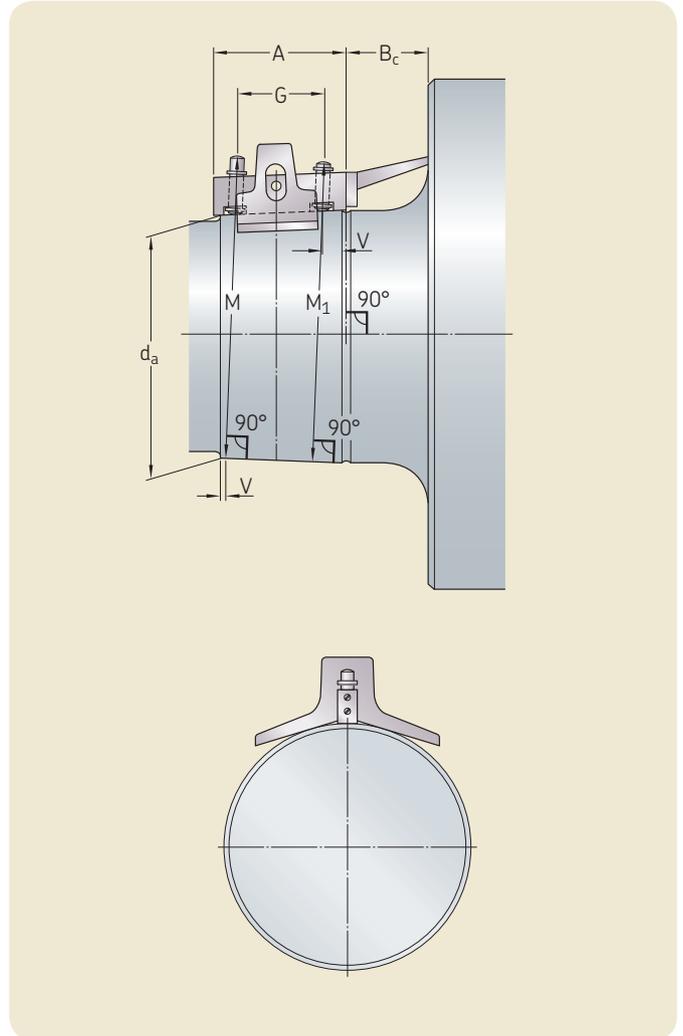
The SKF 9205 taper gauge on a tapered journal.
